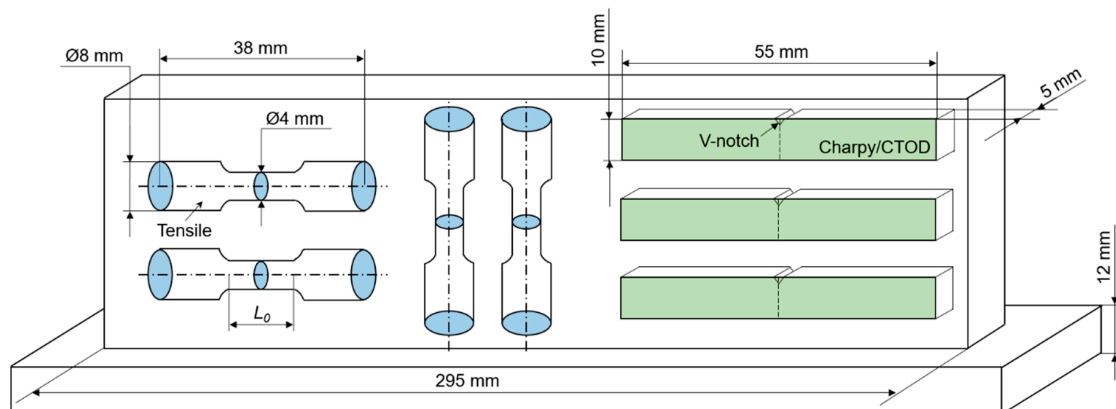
Mechanical testing of additively manufactured walls. Horizontal tensile samples to the left, vertical tensile specimens in the middle and Charpy V and CTOD (crack tip opening displacement) samples to the right. The latter two specimen types have different notches.
